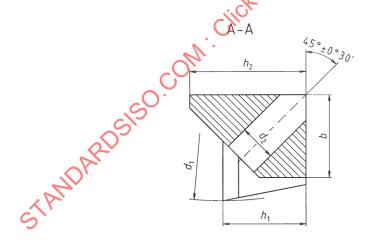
Sectional drawing A-A at height h_1 = 16 mm, 20 mm and 25 mm
